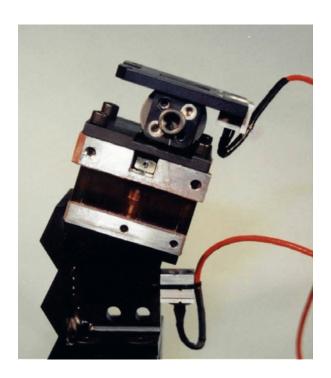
Upper Flex Joint assembled to LTS Weldment
